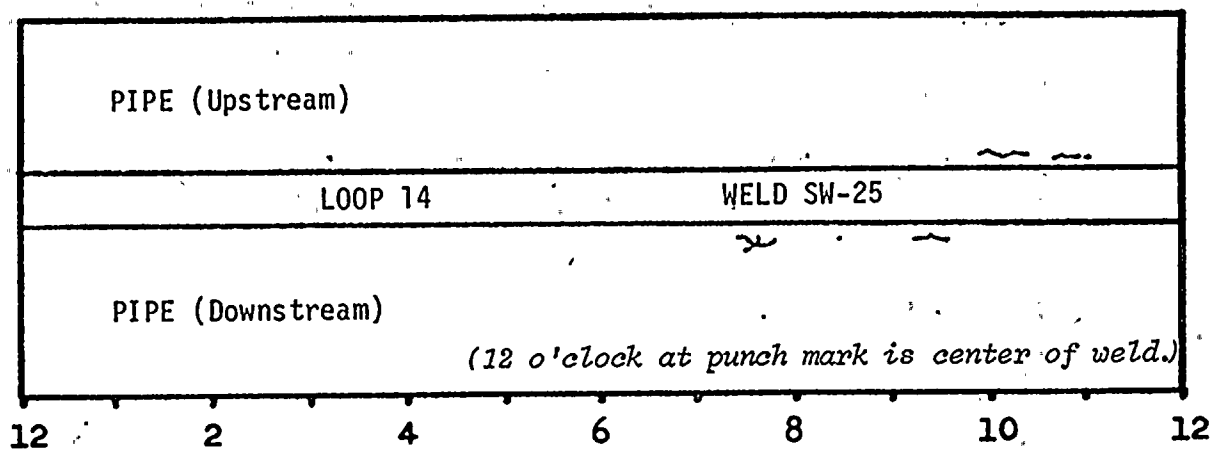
(Continued). Dye Penetrant inspection results, Loop 14 welds. (Refer to Figure 4 for weld locations.)
